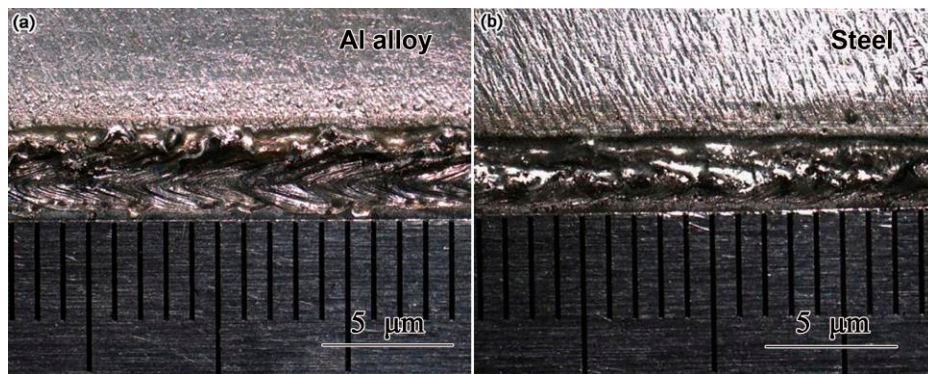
Weld appearance of Al/steel butt joints produced by autogenous laser keyhole welding: (a) top surface; (b) bottom surface.
